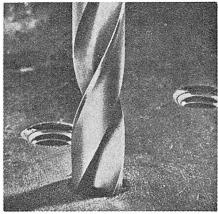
First step in repairing damaged threads is to drill out old threads using exact size drill recommended in instructions provided with thread repair kit. Drill all the way through an open hole or all the way to bottom of blind hole, making sure hole is straight and that centerline of hole is not moved in drilling process, (Series of photos provided by Heli-Coil Corp., Danbury, Conn.)
